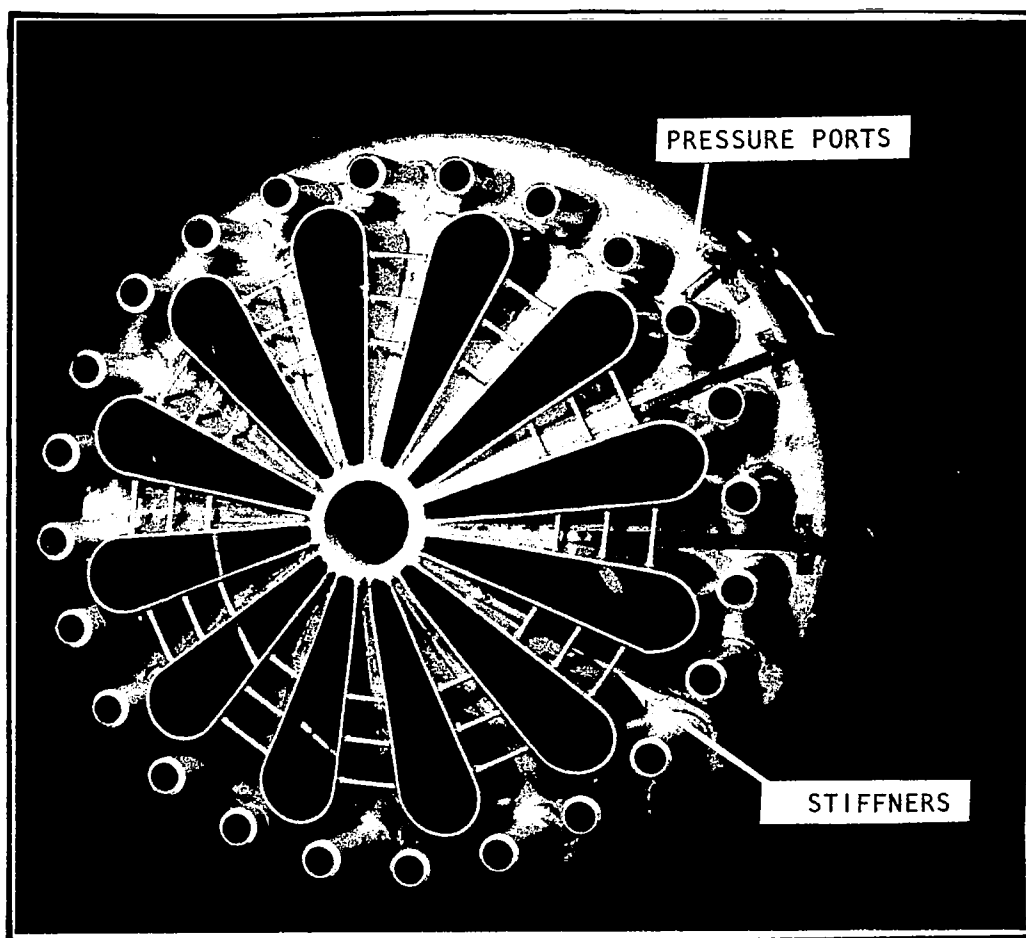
A close-up view of the daisy lobe suppressor with the plug removed.
